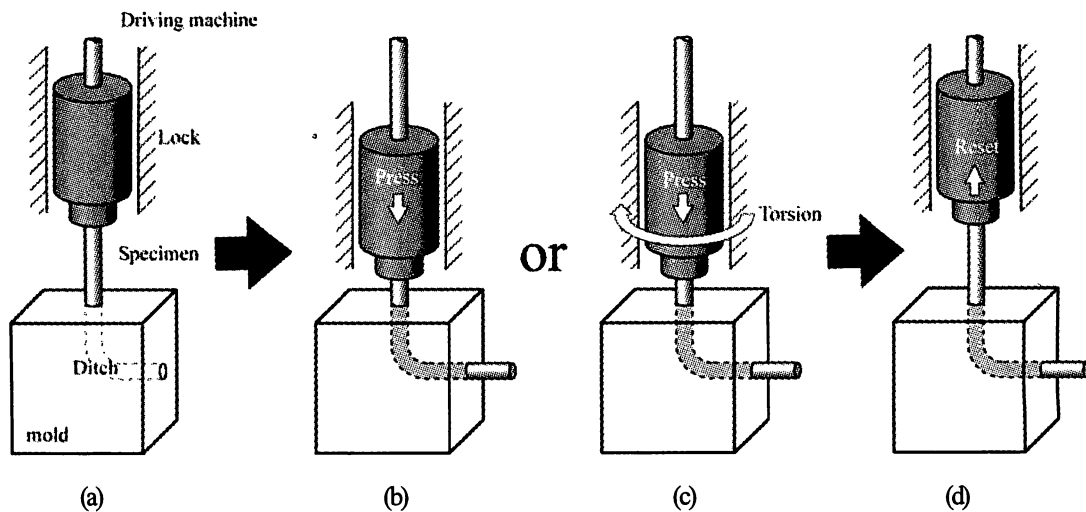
Schematic illustration of new grain refinement technique by using present method's mold and material testing machine. (a): lock of the specimen by driving machine, process of (b): extrusion, (c): extrusion with torsion and (d): reset the position of the driving machine.
